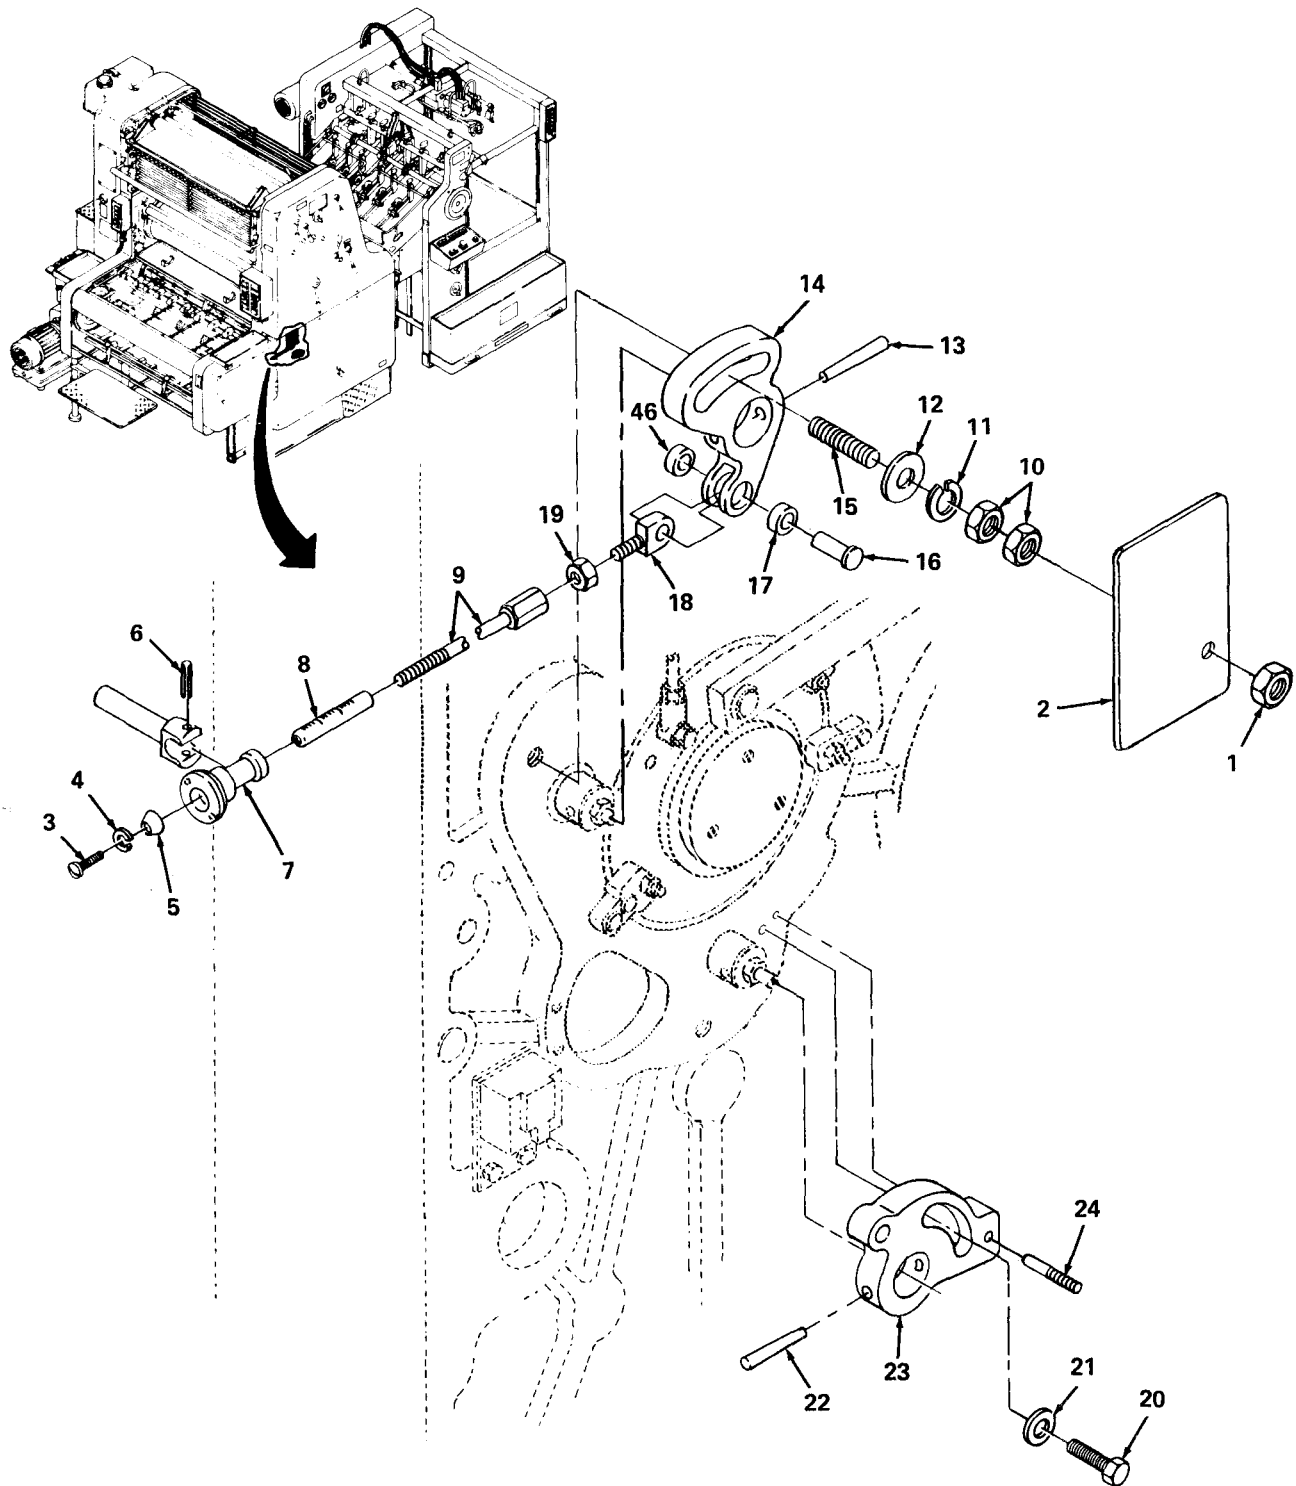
Spindle and Bearing Bolt Assembly (D/S) Removal.
